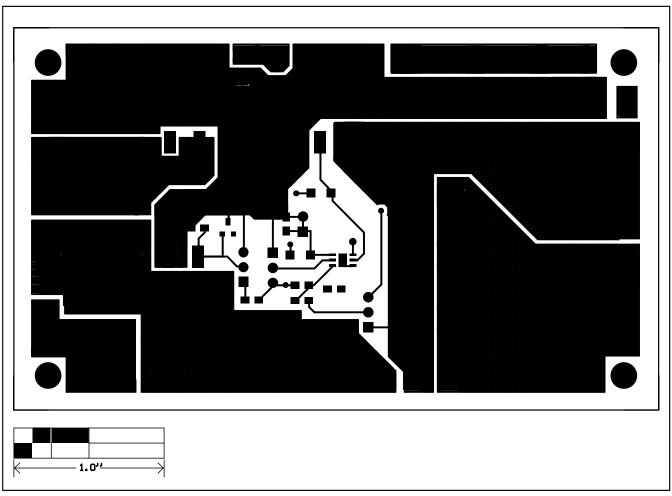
MAX6495 EV Kit PCB Layout—Component Side
